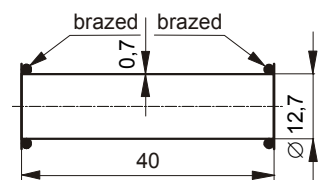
Dimension of flexible mold (copper tube) used in CIP
